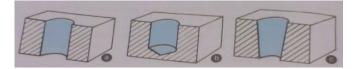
Fig.1 Various Holes (a) Cylindrical through hole, (b) Blind Hole, (c) Tapered Hole
